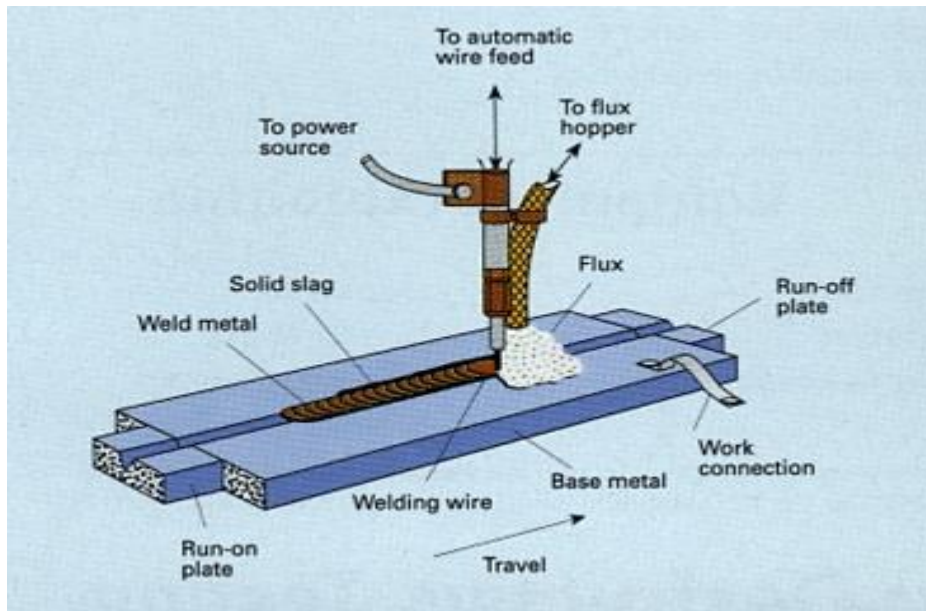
Submerged Arc Welding Operation [<http://www.twi.co.uk>]
